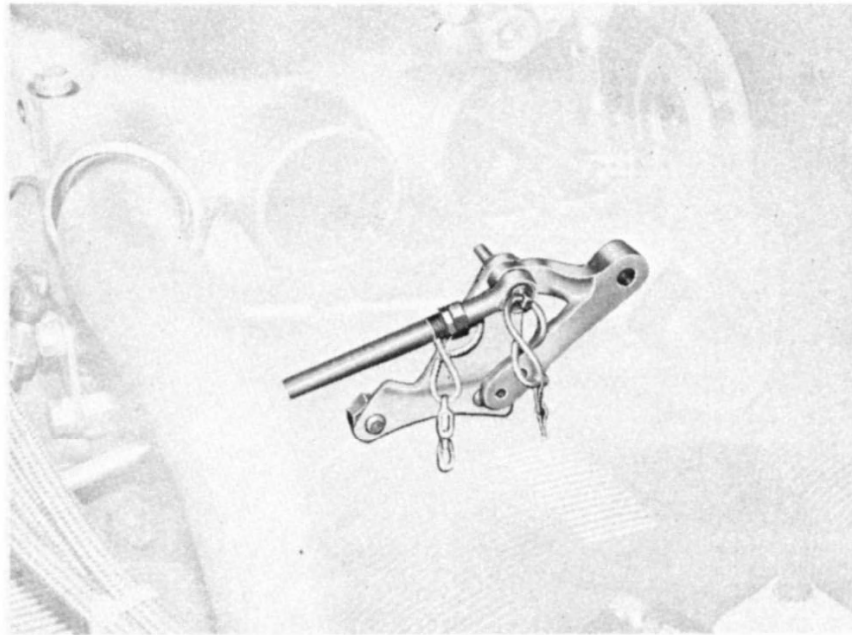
Fixture ST-319 Installed and Showing Cross Shaft Control Level in Closed Throttle Position
